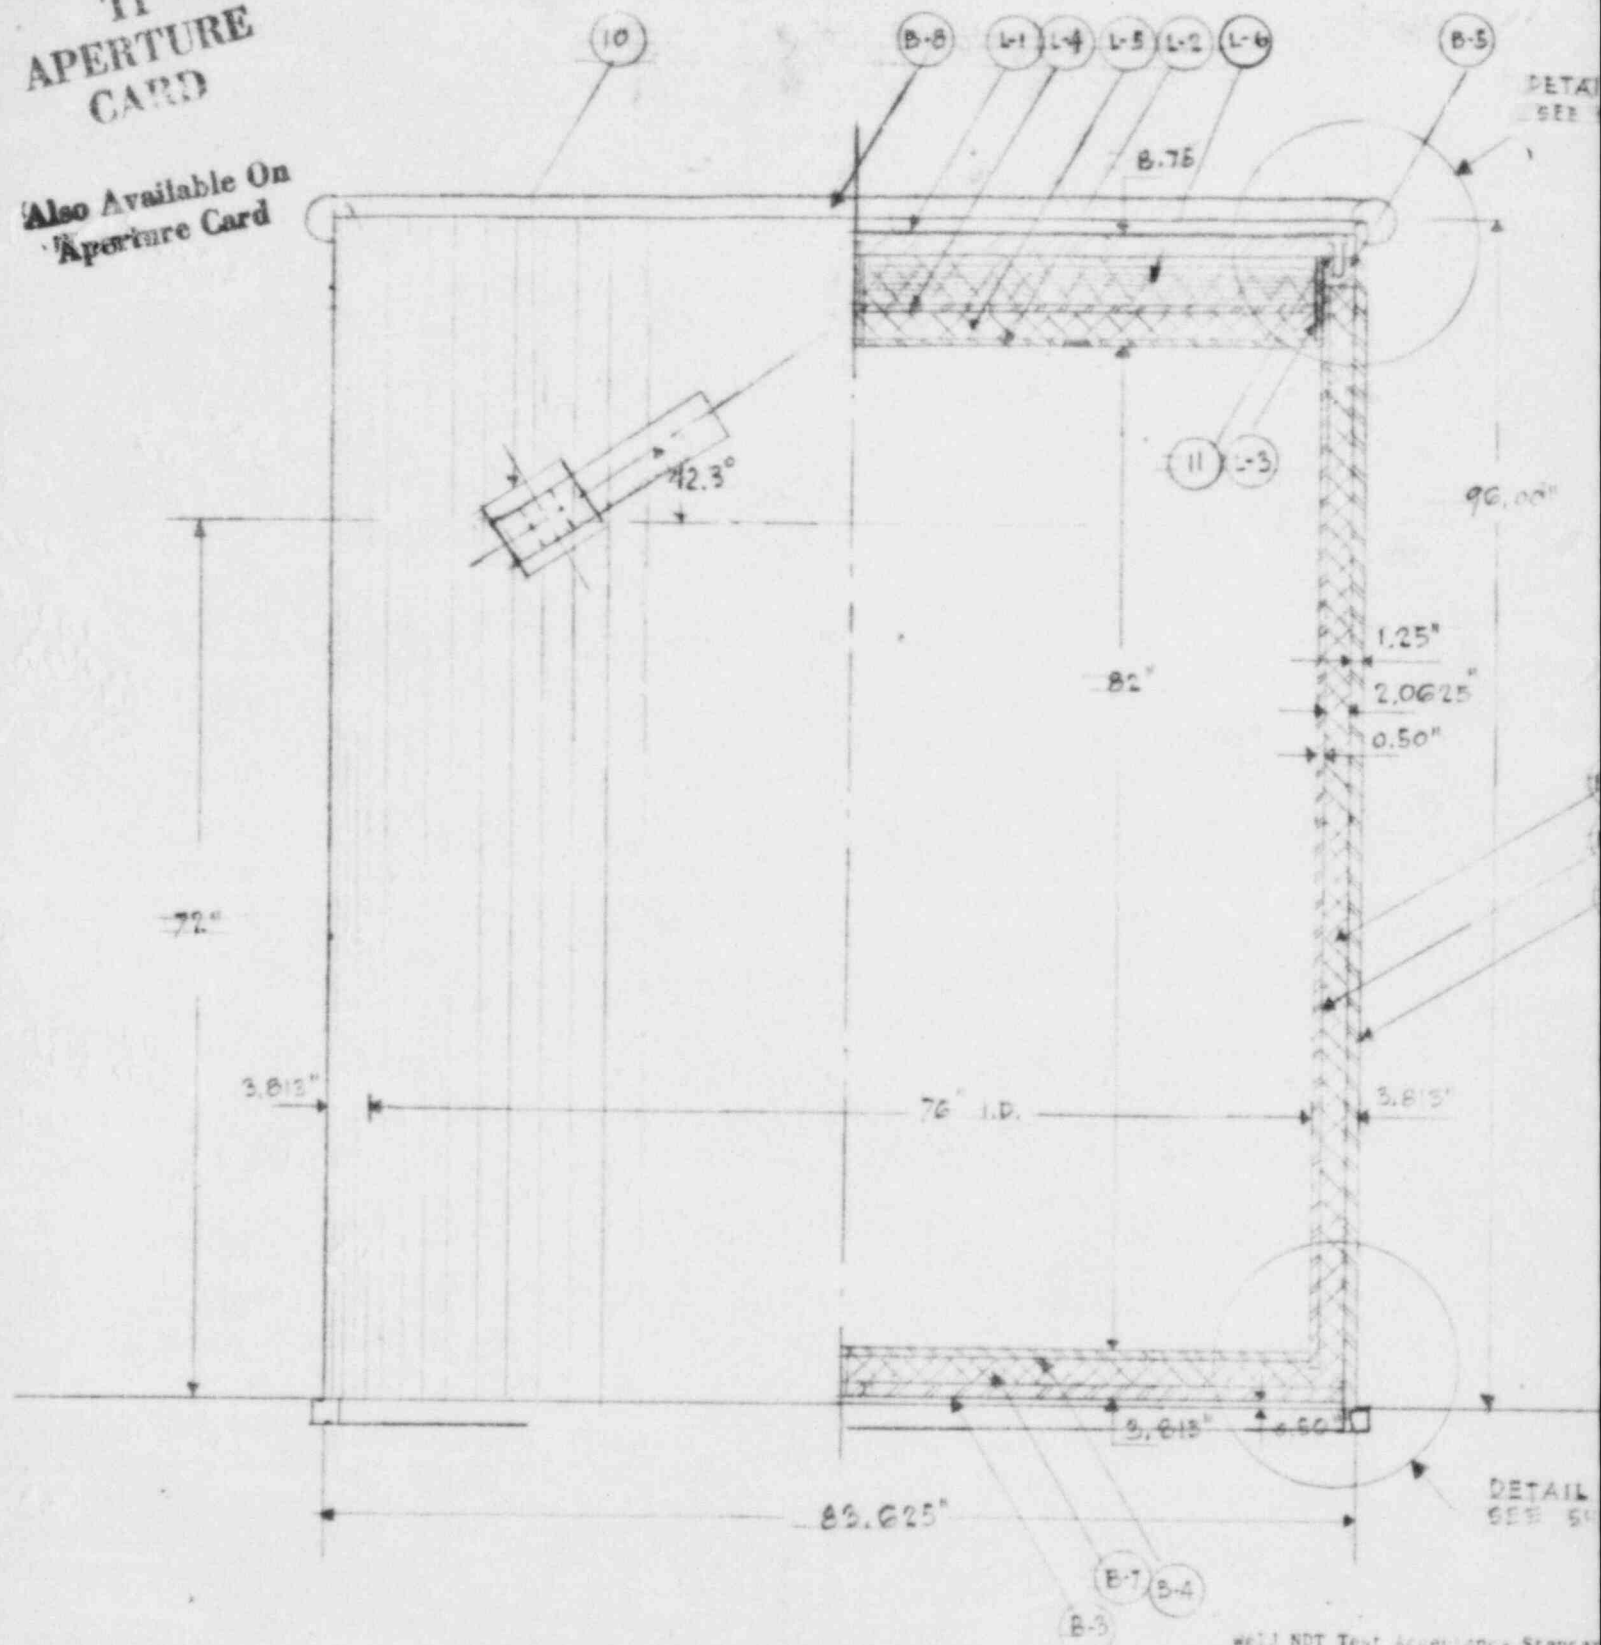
to be fillet welded using multipass string technique using SMAW & SAW processes. Groove design to be double bevel with 52° bends and 1/8" maximum root gap. Weld to be 100% NDT using x-ray.
